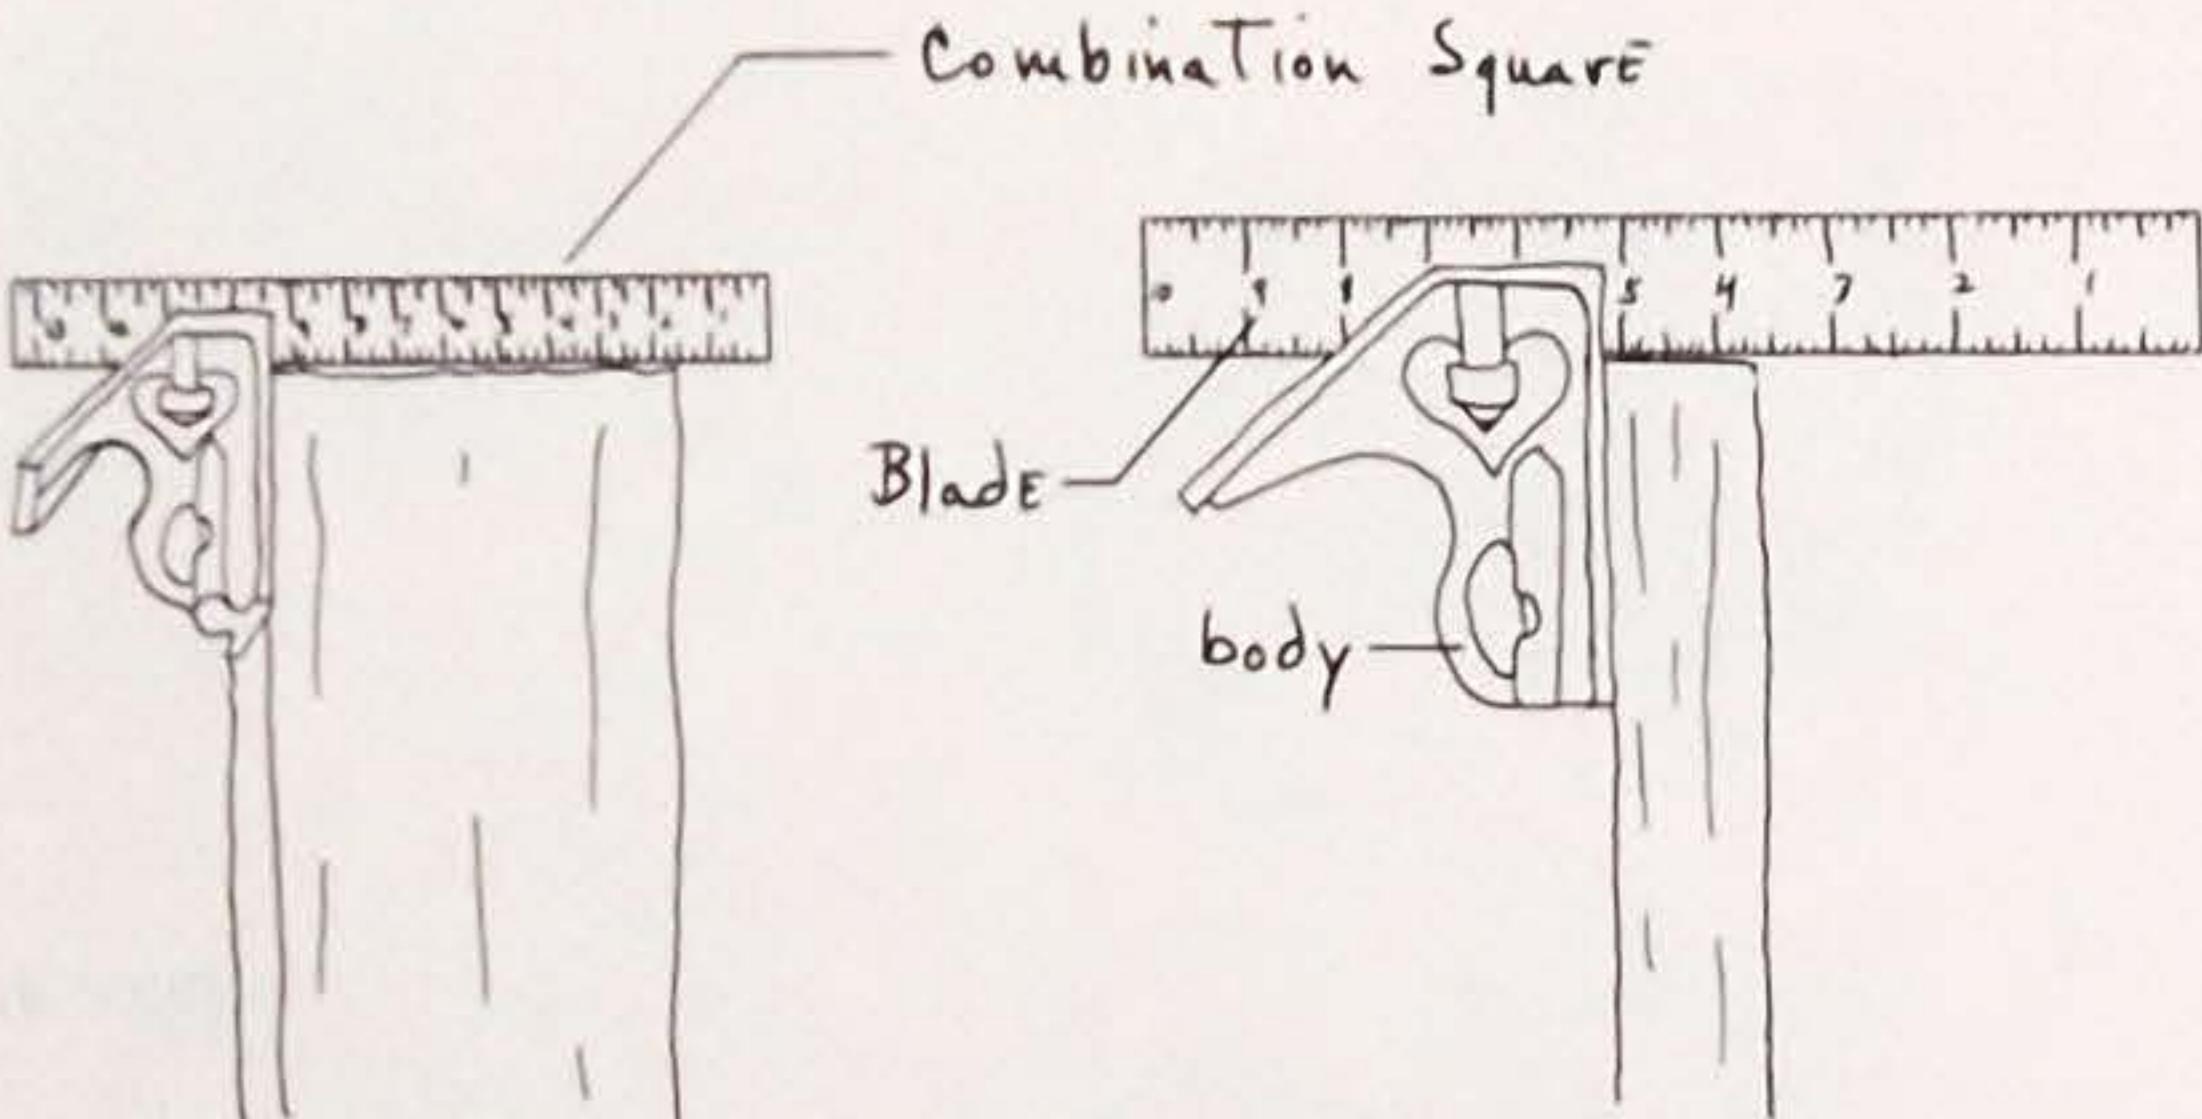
CHECKING THE SQUARENESS OF THE WIDTH & EDGE CUTS
